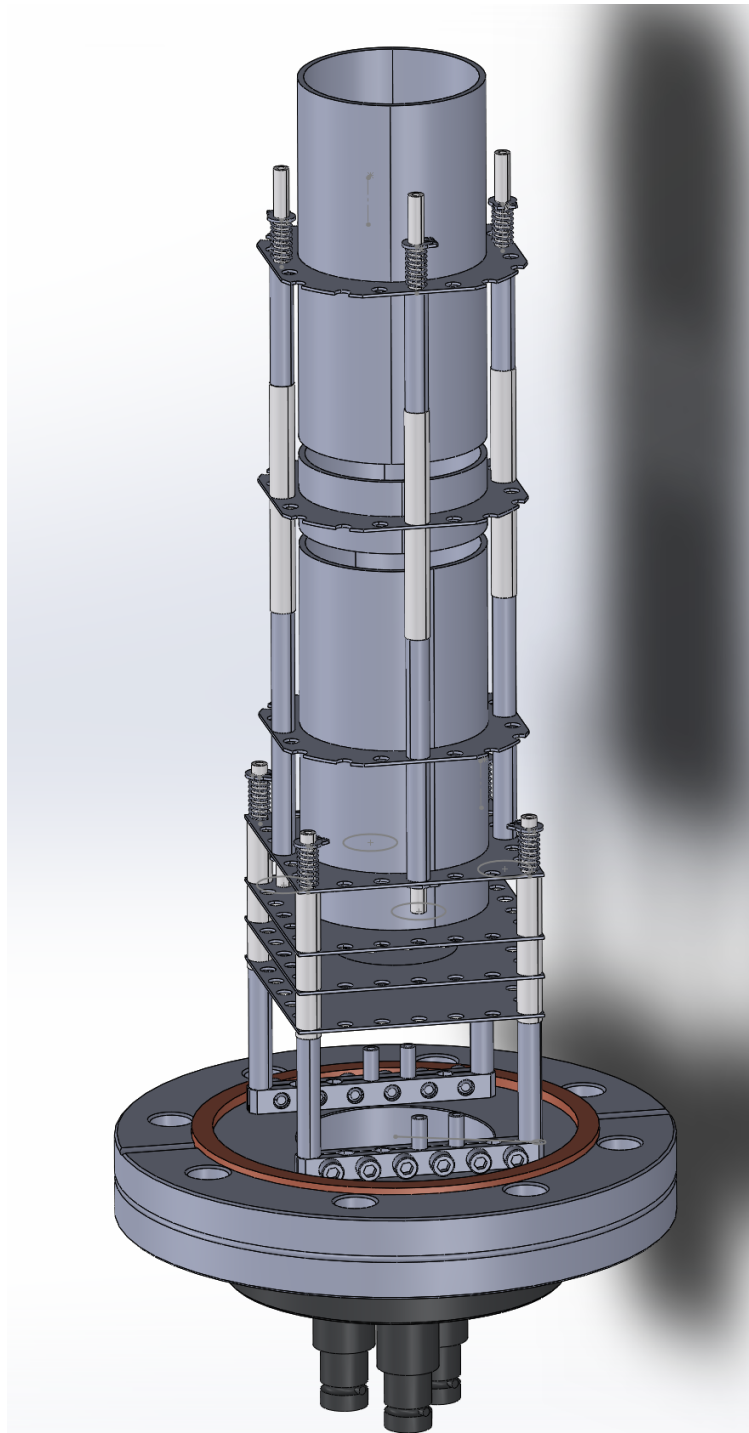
CAD Drawing of the electrode assembly. The assembly is held in place using C series alumina tubing, and part positioning is achieved by using alumina and stainless steel C series spacers of various lengths. As a length scale, long Einzel lens electrodes' height is 7.62 cm.
